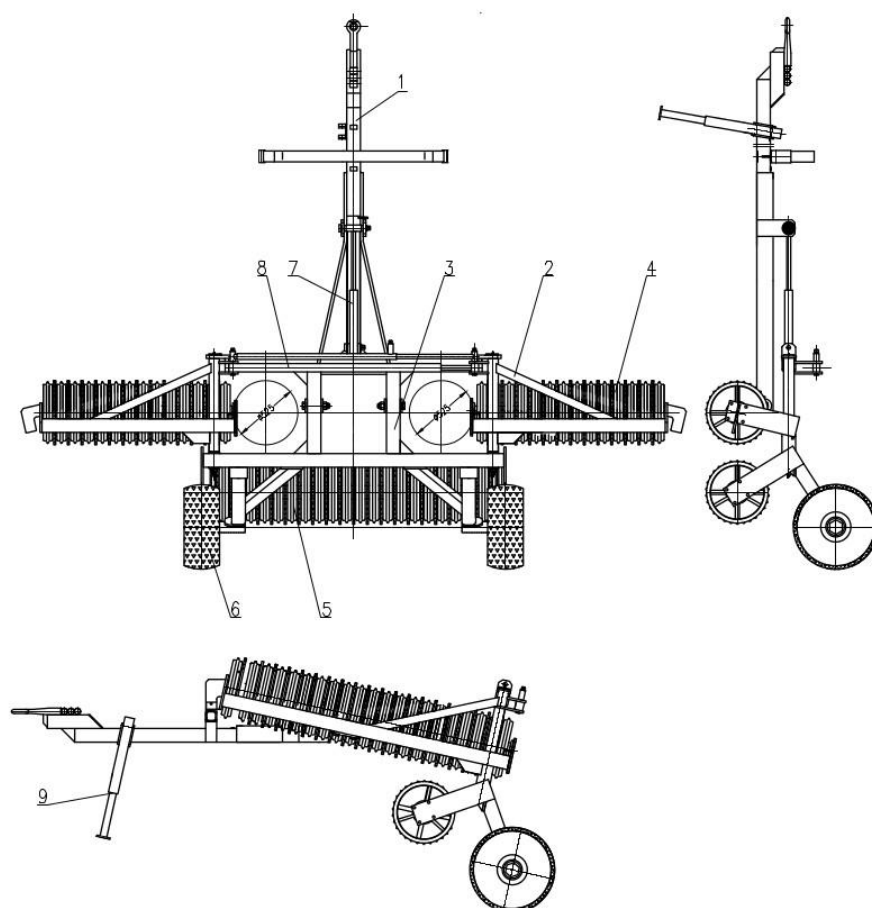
Cambridge roller, type MCB/MCW 4.5; 6.2; 8.0 m: 1 - drawbar, 2 - side frame, 3 - mid frame, 4- side section with working wheels (Fig. 3), 5 mid-section of working wheels, 6 - driving system, 7 - hydraulic system (Fig. 6), 8 - lock, 9 - smoothing harrow (Fig. 5)
